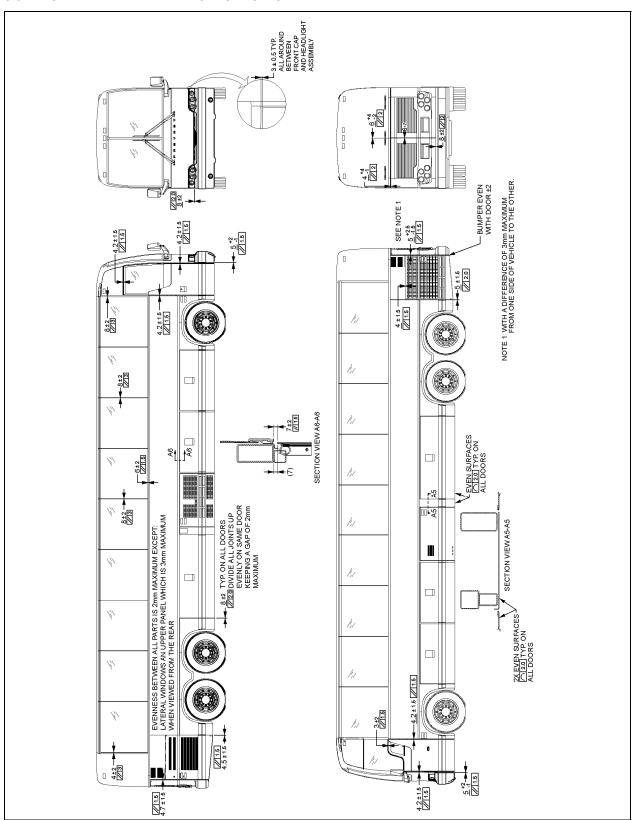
BODY PANEL AND WINDOW SPACING (TYPICAL)
